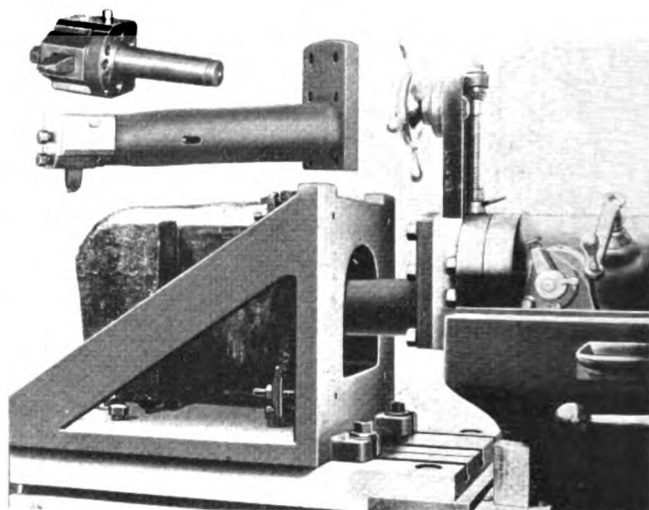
The fixtures and head for machining electric locomotive driving-wheel boxes for roller-bearing fits
